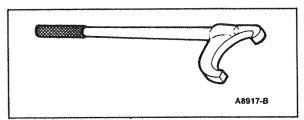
T83T-9000-C Injection Pump Rotating Tool
